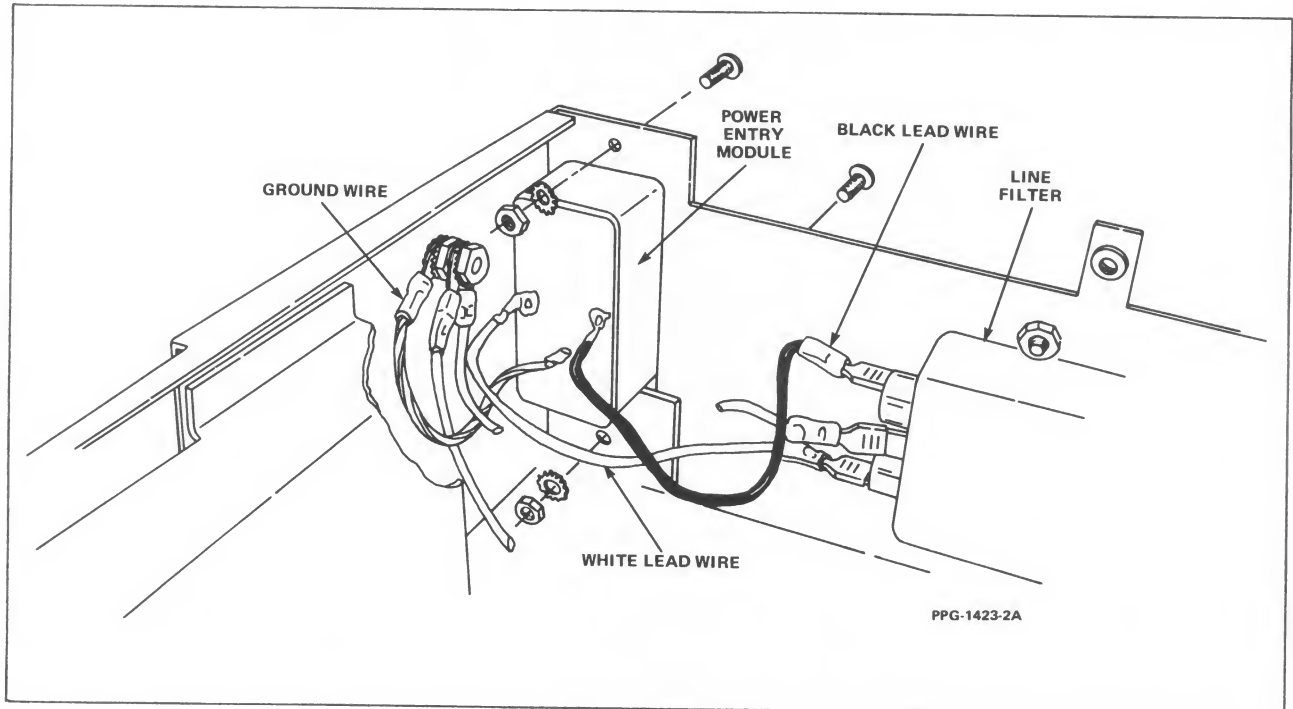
Tape Cartridge Drive Enclosure Power Entry Module
